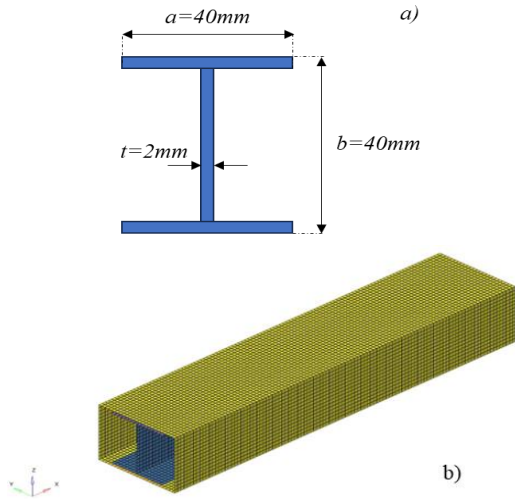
a. Aluminum stiffener shape; b. Installation of the stiffener into the steel tube
